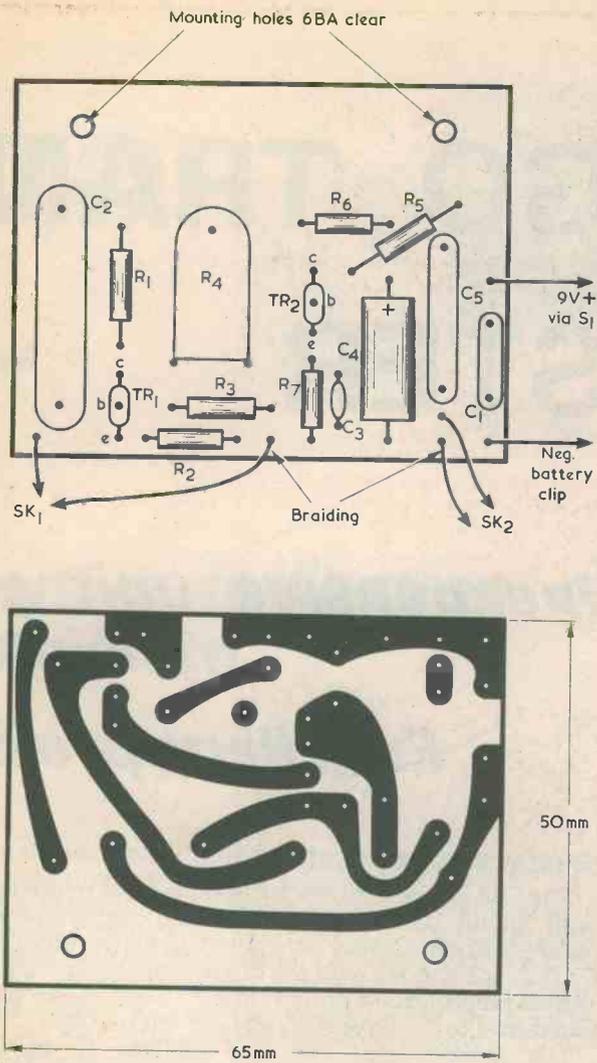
The layout of the amplifier is rather critical. A suitable printed circuit board is shown here, reproduced full size.
